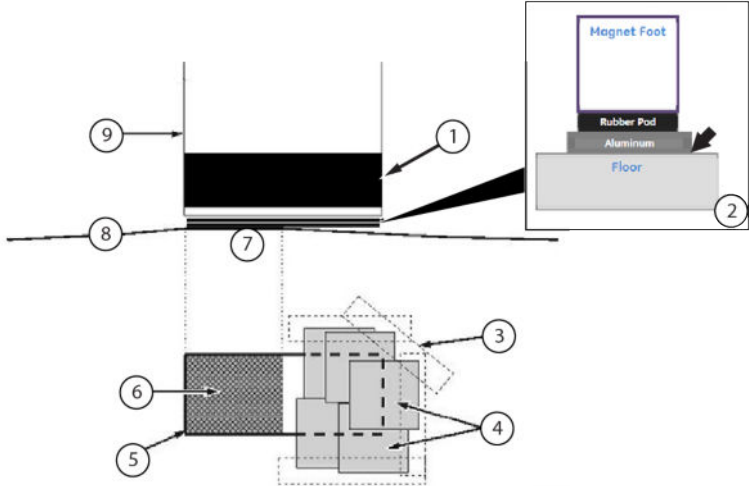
Magnet anchoring, shown with aluminum spacer removed\
